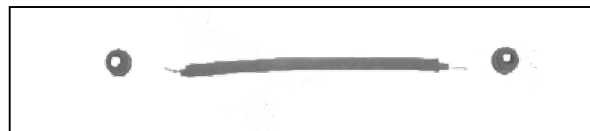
Insert the GTO15 cable inside the WB3760 sleeving
